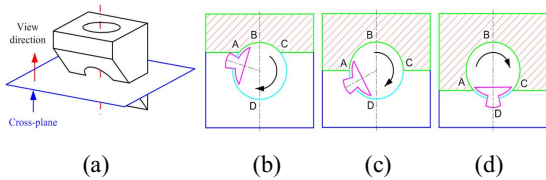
Deburring process for the burr on inclined exit surface according to different position of tool
